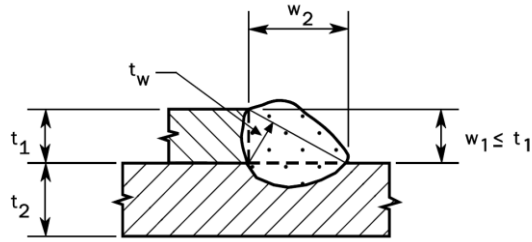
Fillet Welds-Lap Joint [9].
